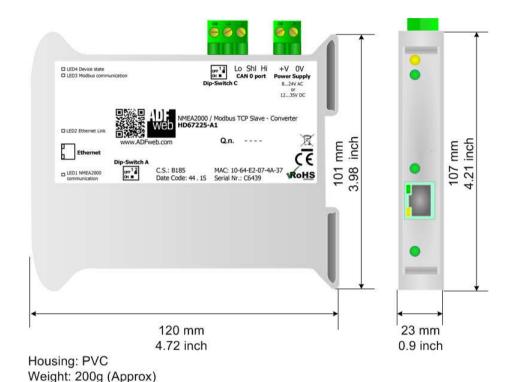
Mechanical dimensions scheme for HD67225-A1
